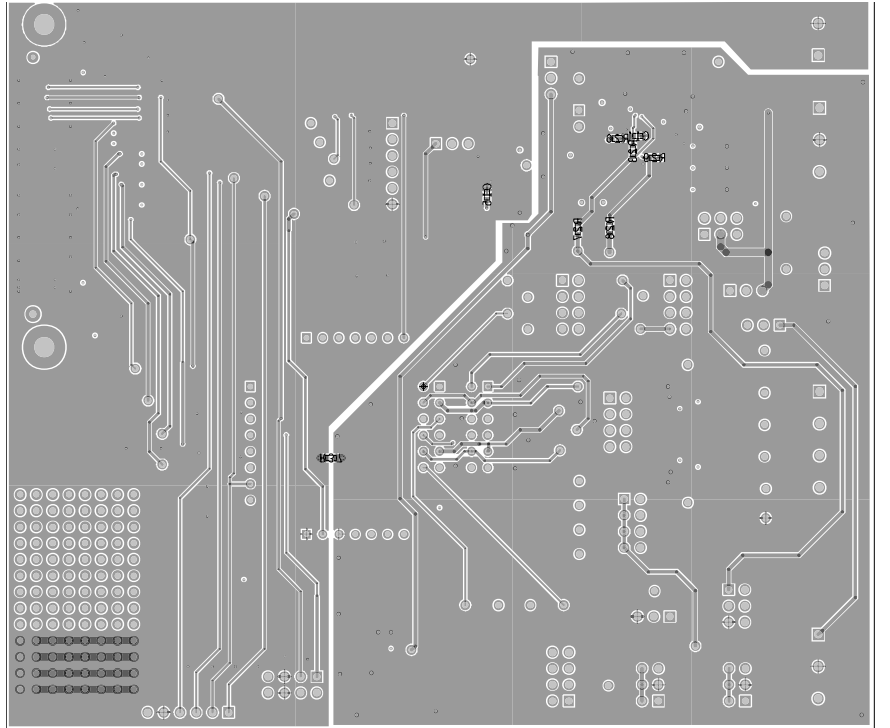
Bottom Layer Side PCB Drawing of Motherboard
